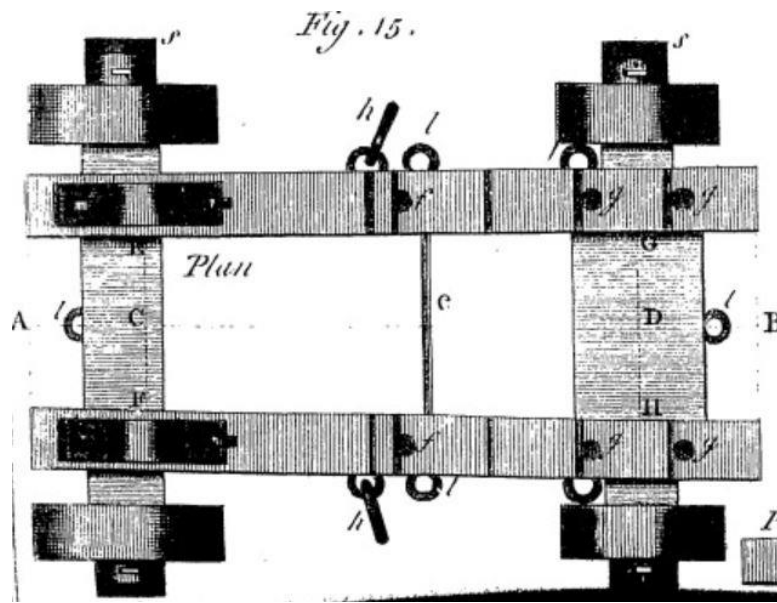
Plan view of Muller's ship carriage c.1757 (Muller 1757:95)
